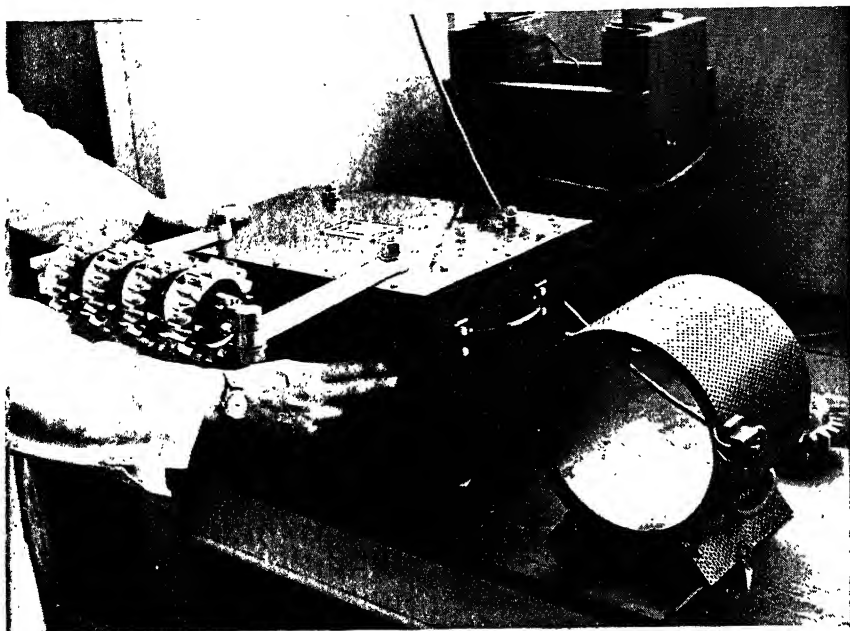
CRACK DETECTING WITH JOHNSON-FEL DETECTOR ON REDUCTION GEAR PINIONS
